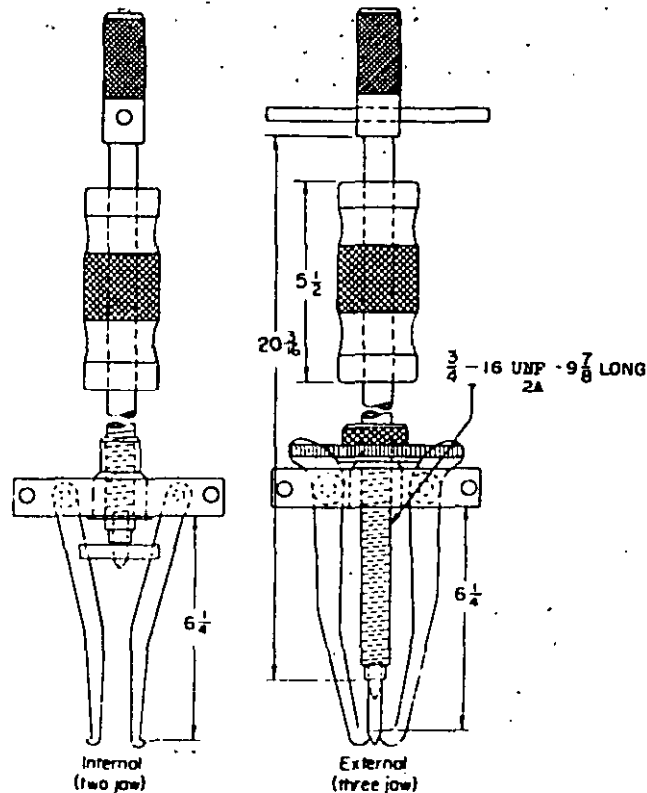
Type III, class 2, style B, puller, mechanical, slide hammer, gear and bearing, two- and three-jaw, external and internal, heavy duty.
